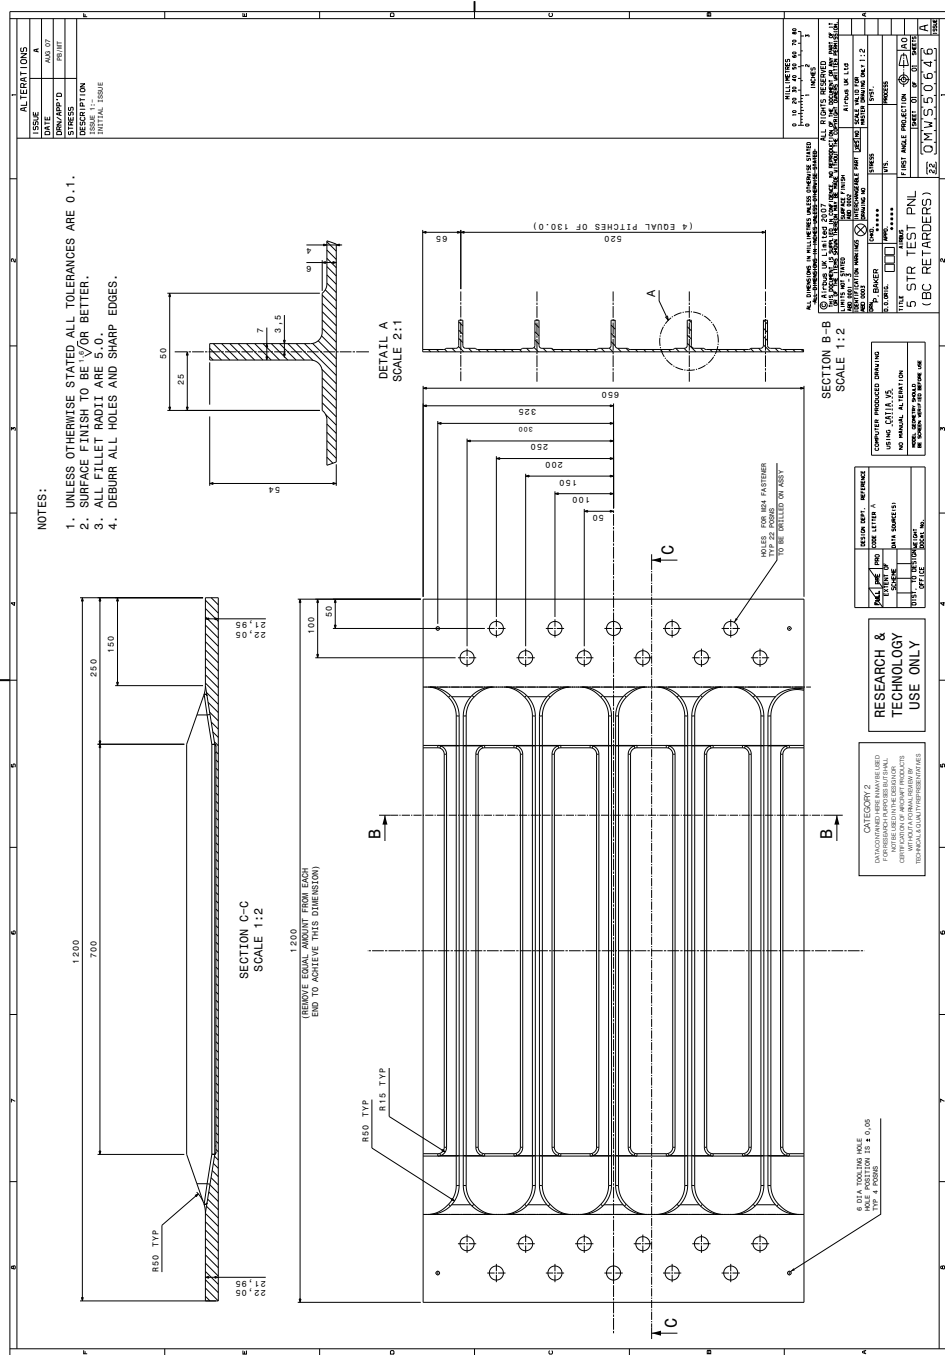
Technical drawing of the un-reinforced large-scale integral skin-stringer panel. The drawing was provided courteously by Airbus.
